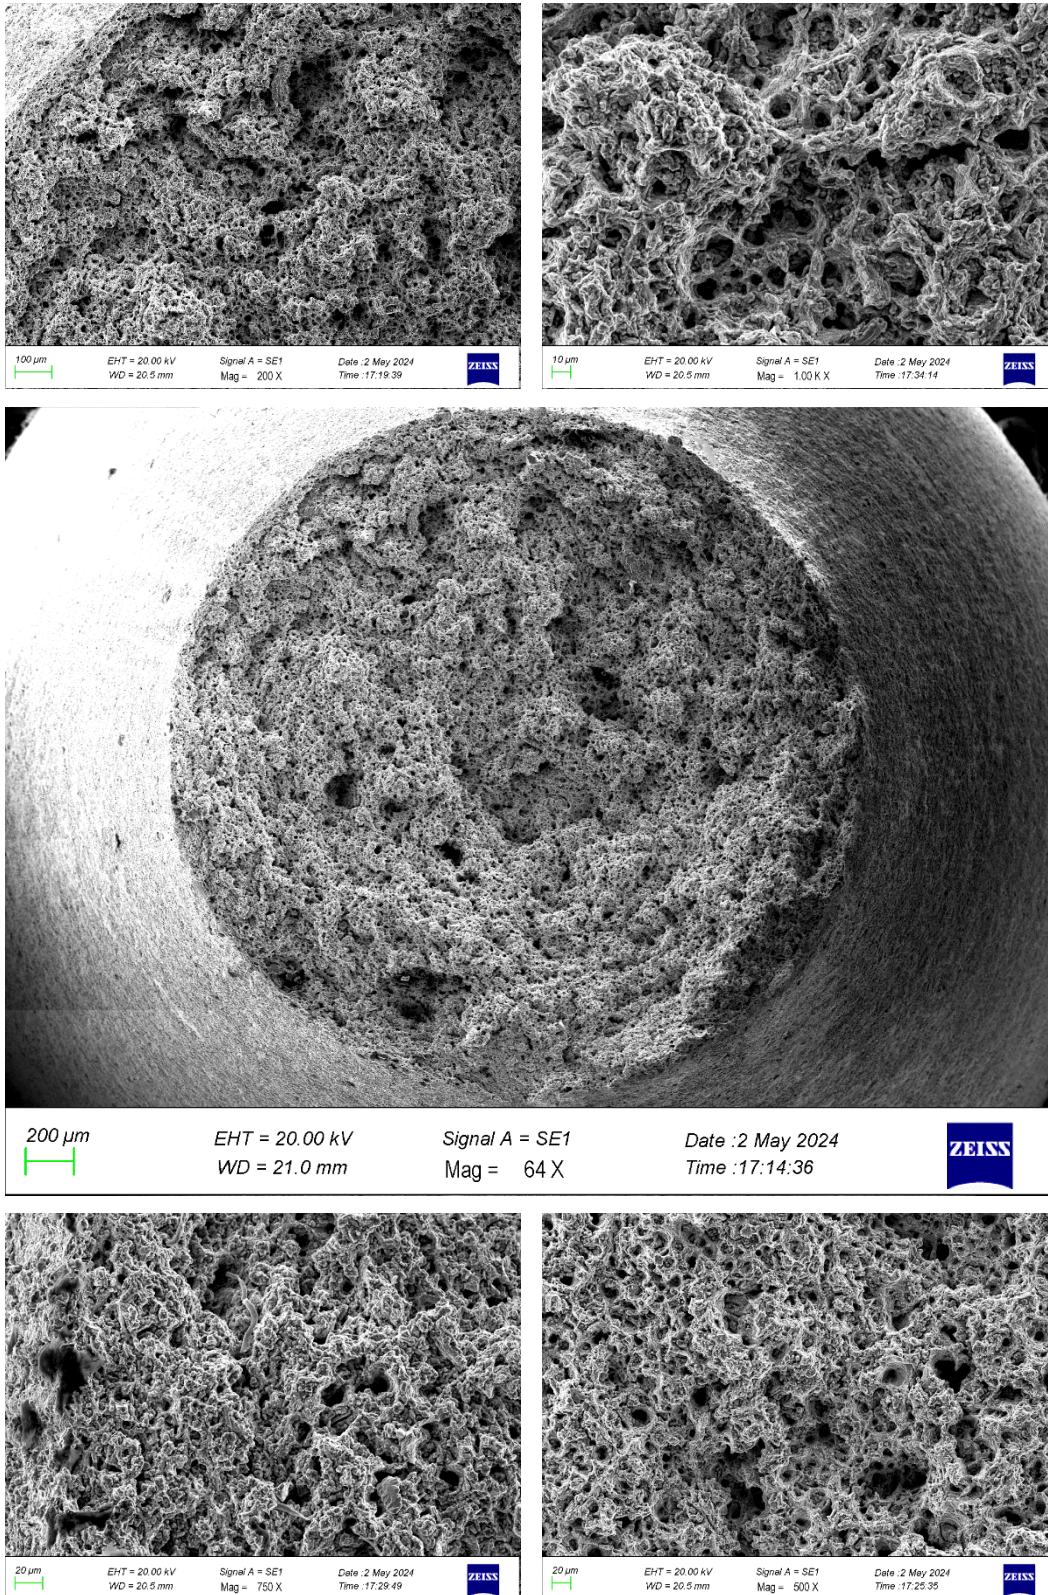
Fracture morphology under SEM after hot tensile test at 1125°C
